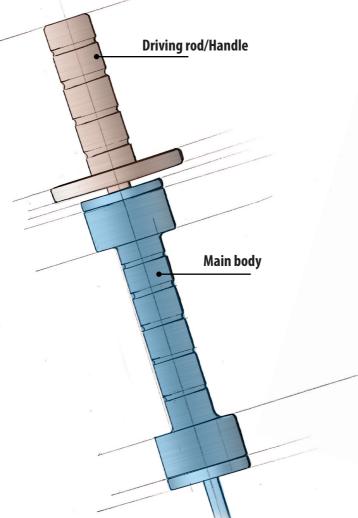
DriveFit devided into two main parts; Main body and Driving rod/Handle
